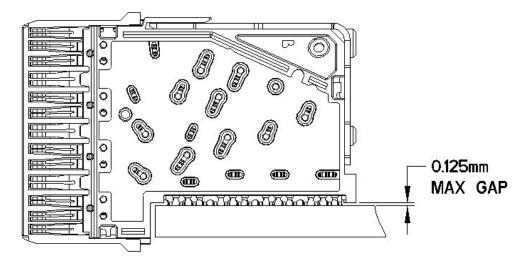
Fully Seated Inspection Dimension: Daughtercard Receptacle
